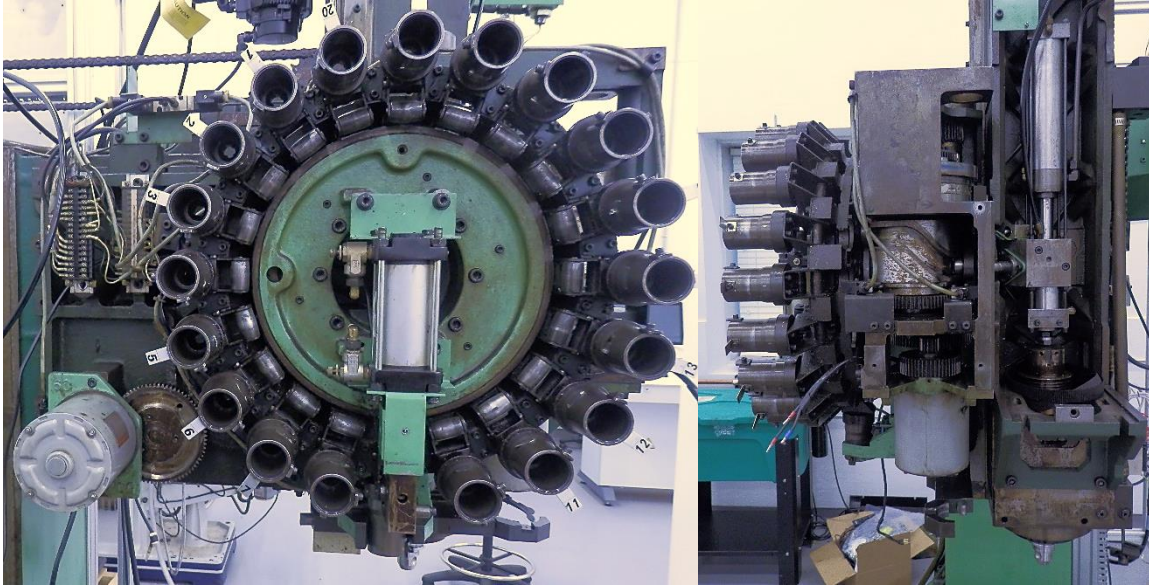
Tool magazine with tool selection piston and induction motor (left), tool replacement arm, with cam mechanism, induction motor and tool holder hydraulics (right)
